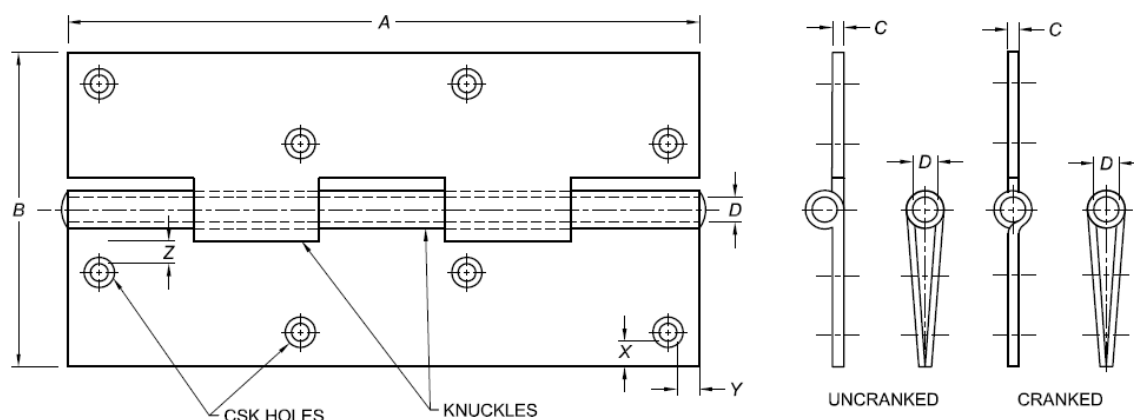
TYPICAL SKETCH FOR LIGHT, MEDIUM AND HEAVY WEIGHT STAINLESS STEEL BUTT HINGES
